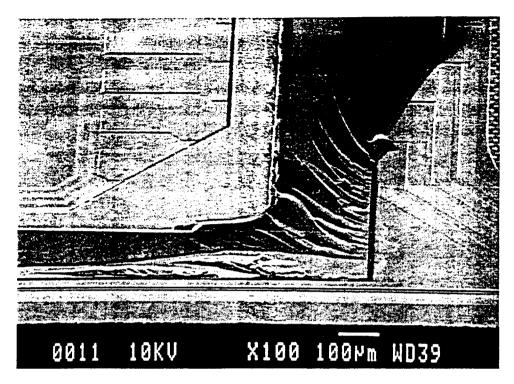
Closeup view of the right hand corner of the package pulled apart.
